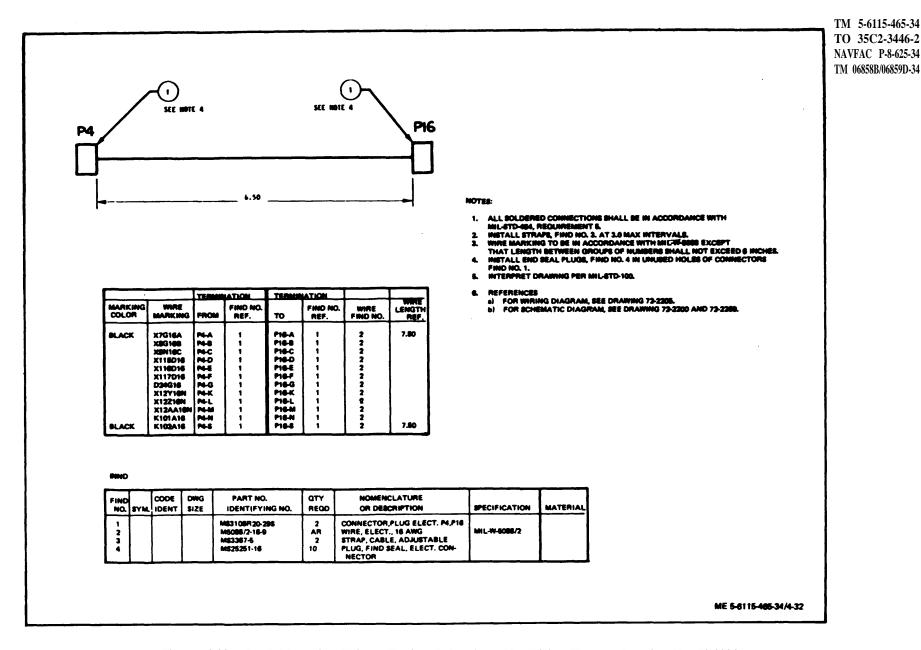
Load Measuring Unit to Tactical Relay Assembly Wiring Harness, Drawing No. 72-2234
